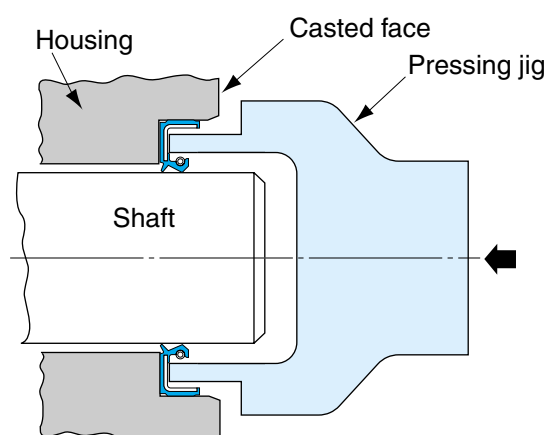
Seal press-fitting jig for shouldered housing bore
